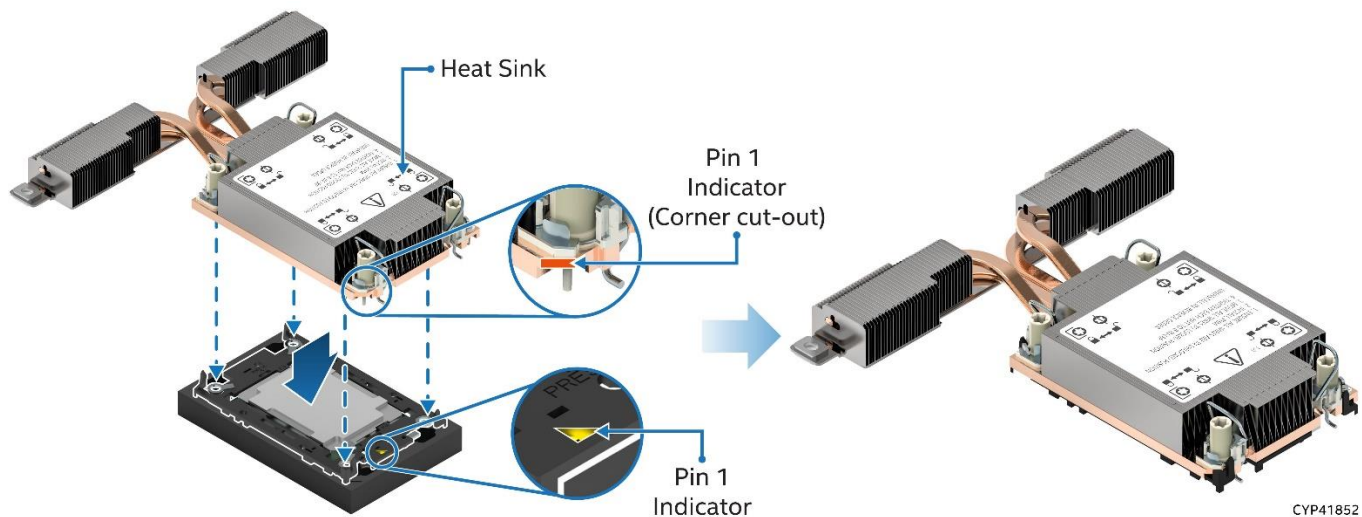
Pin 1 Indicator of Processor Carrier Clip
